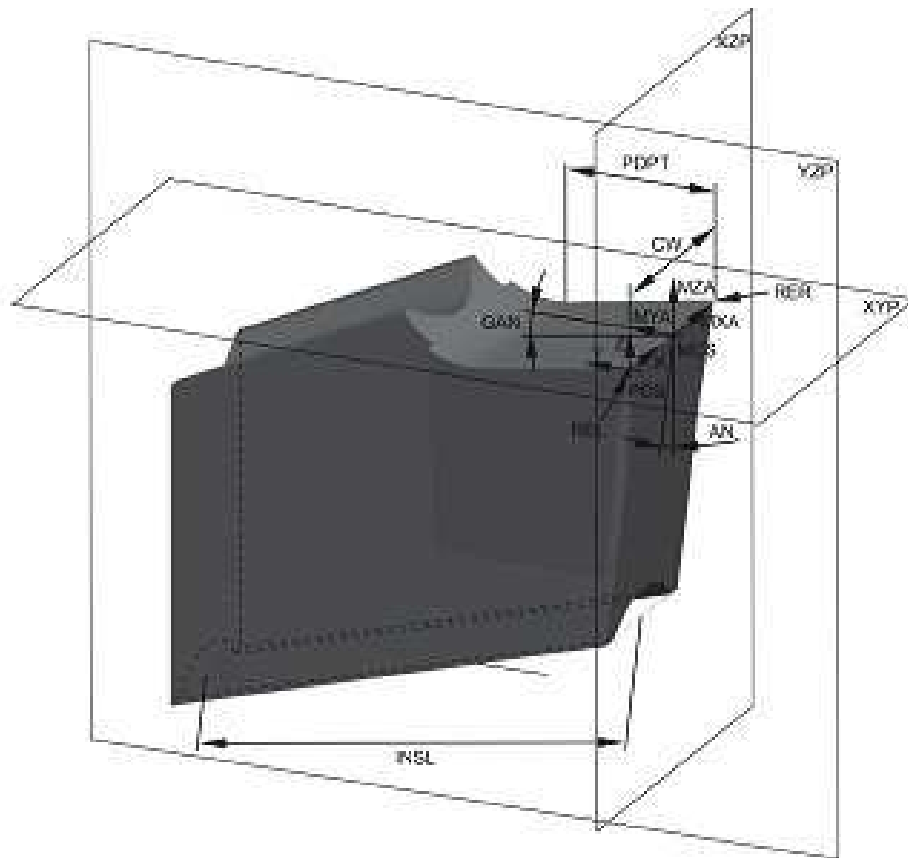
Self-clamping grooving insert with one cutting edge: basic model
